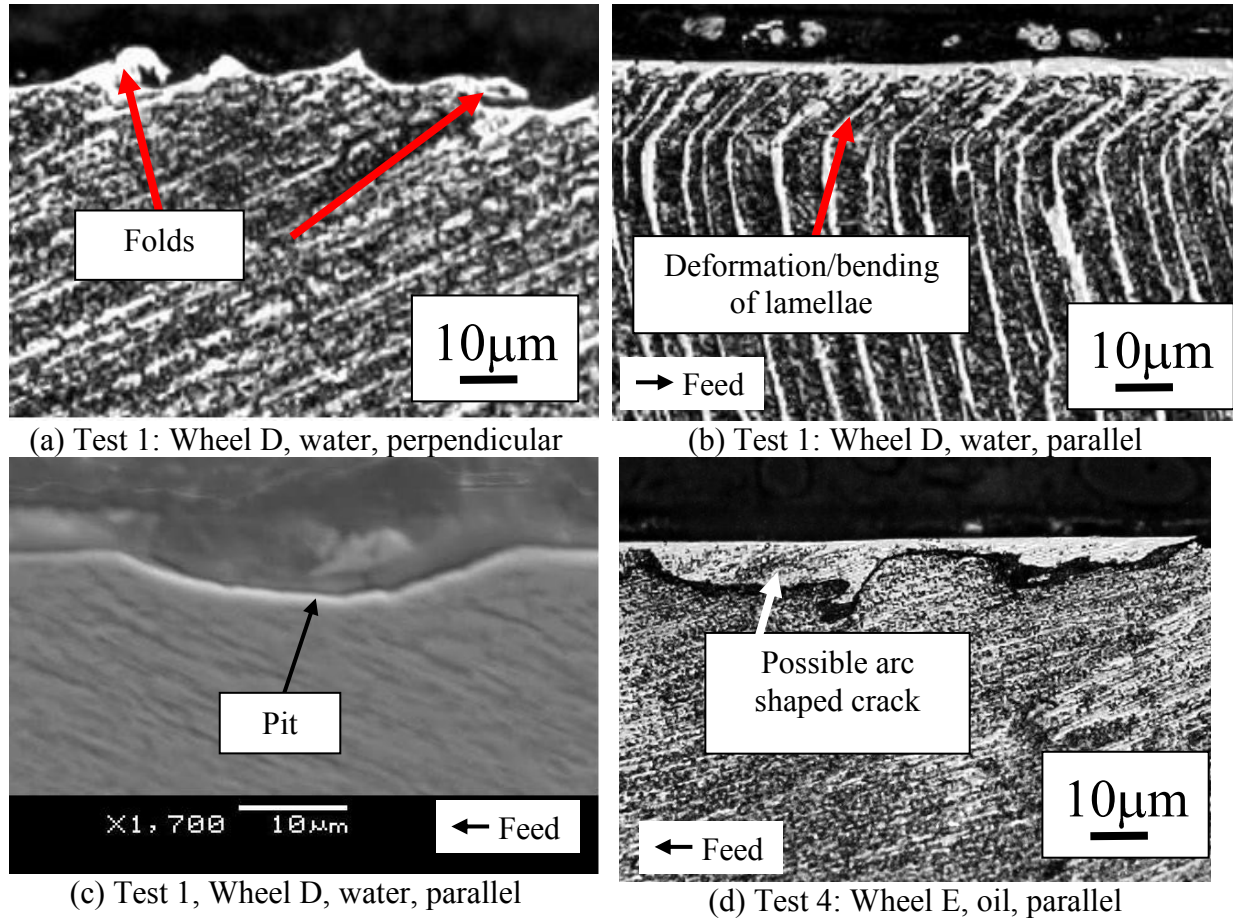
Workpiece surface/subsurface cross-sectional images (Phase 2Bi)
